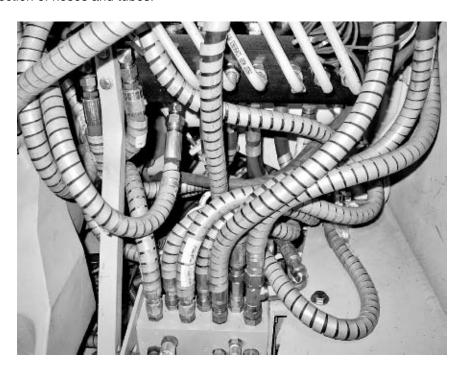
Installation of HDC Primary Manifold Assembly Hydraulic Tubes and Hoses
